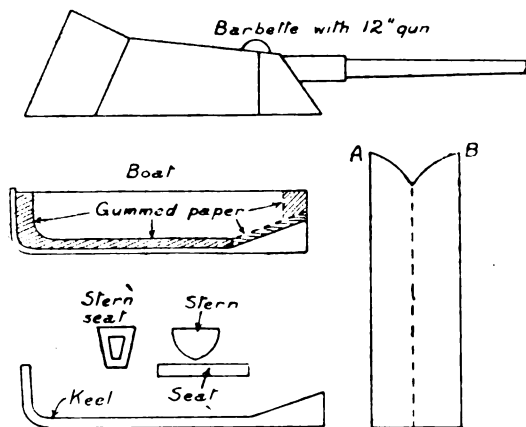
SHOWING METHOD OF MAKING SHIP'S BOATS.
